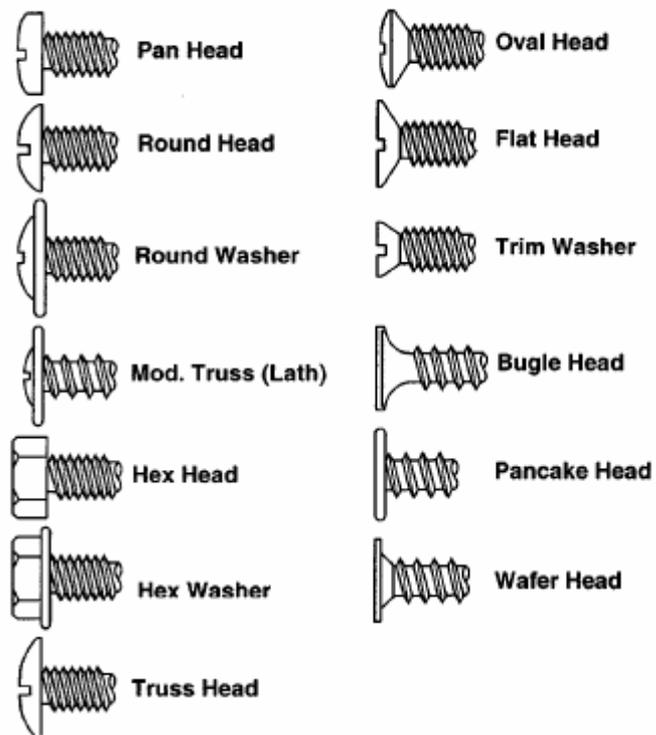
Screw head types. (Light Gauge Steel Engineers Association)
